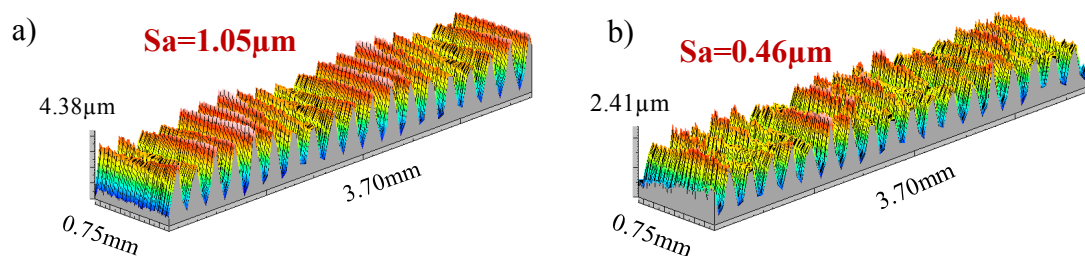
Workpiece surface topography in Test 1 following turning with a) new and b) worn inserts
